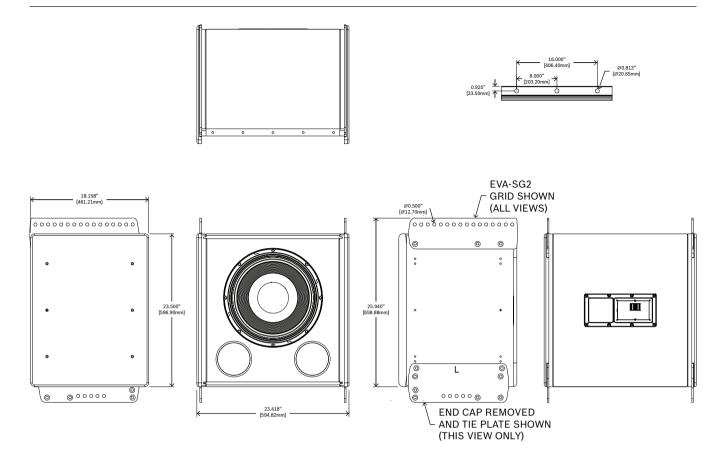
EVA-1151D (discontinued) dimensional views and spreader bar attach holes
